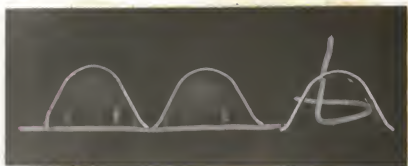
The strip at right was cut out of an explosively formed sample preparatory to mounting in bakelite. The profile at the center of the formed piece is clearly seen, and also the wrinkles at the base.
